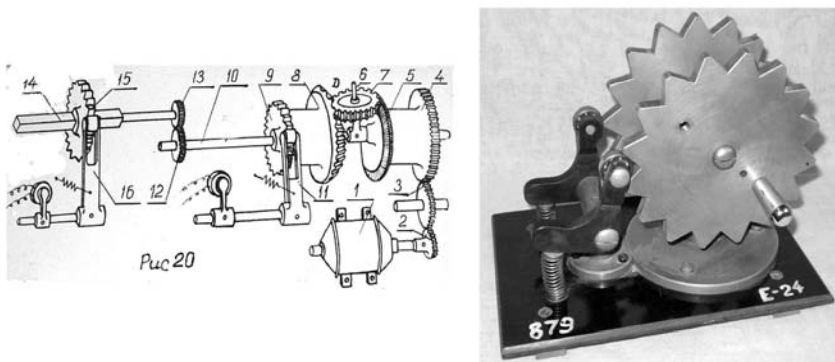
An electric drive with a locking ratchet mechanism and model of the locking ratchet mechanism
